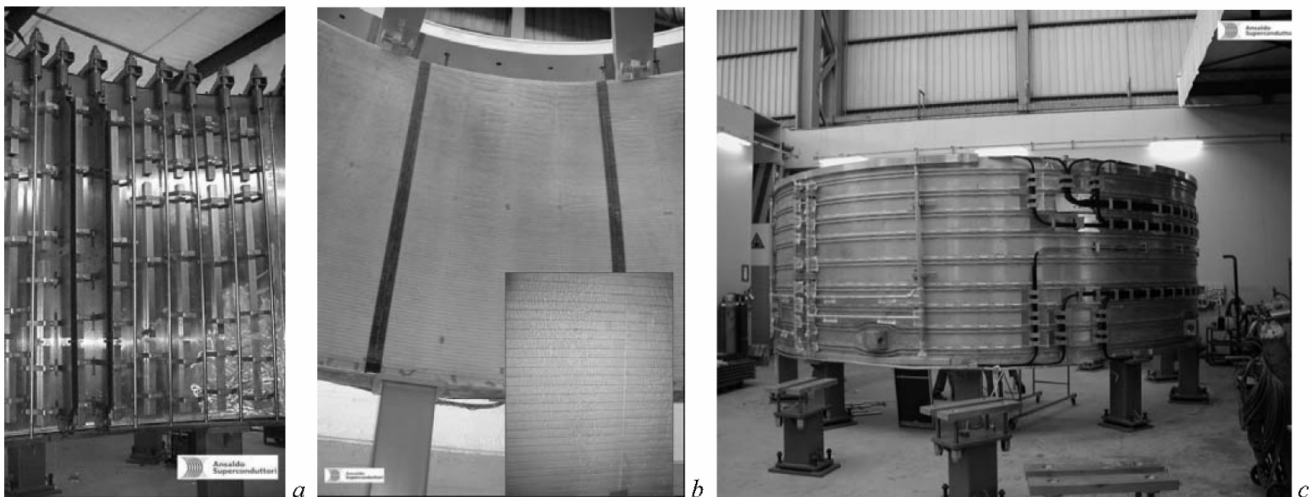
A module during the last construction stages: a) The module has been enclosed inside the impregnation mold. Part of the mold is the Al alloy thin shell, constructed inside the inner bore and tightly coupled to the inner diameter through a mechanical pressing system. Tie rods are used for axial compaction. b) The coil after the impregnation and cleaning. The transparency of the resin allows viewing the winding details. Some resin excess is removed by machining the inner surface. c) Once the electrical exits are formed and the joints are welded, both are insulated and mechanically fixed to the mandrel
